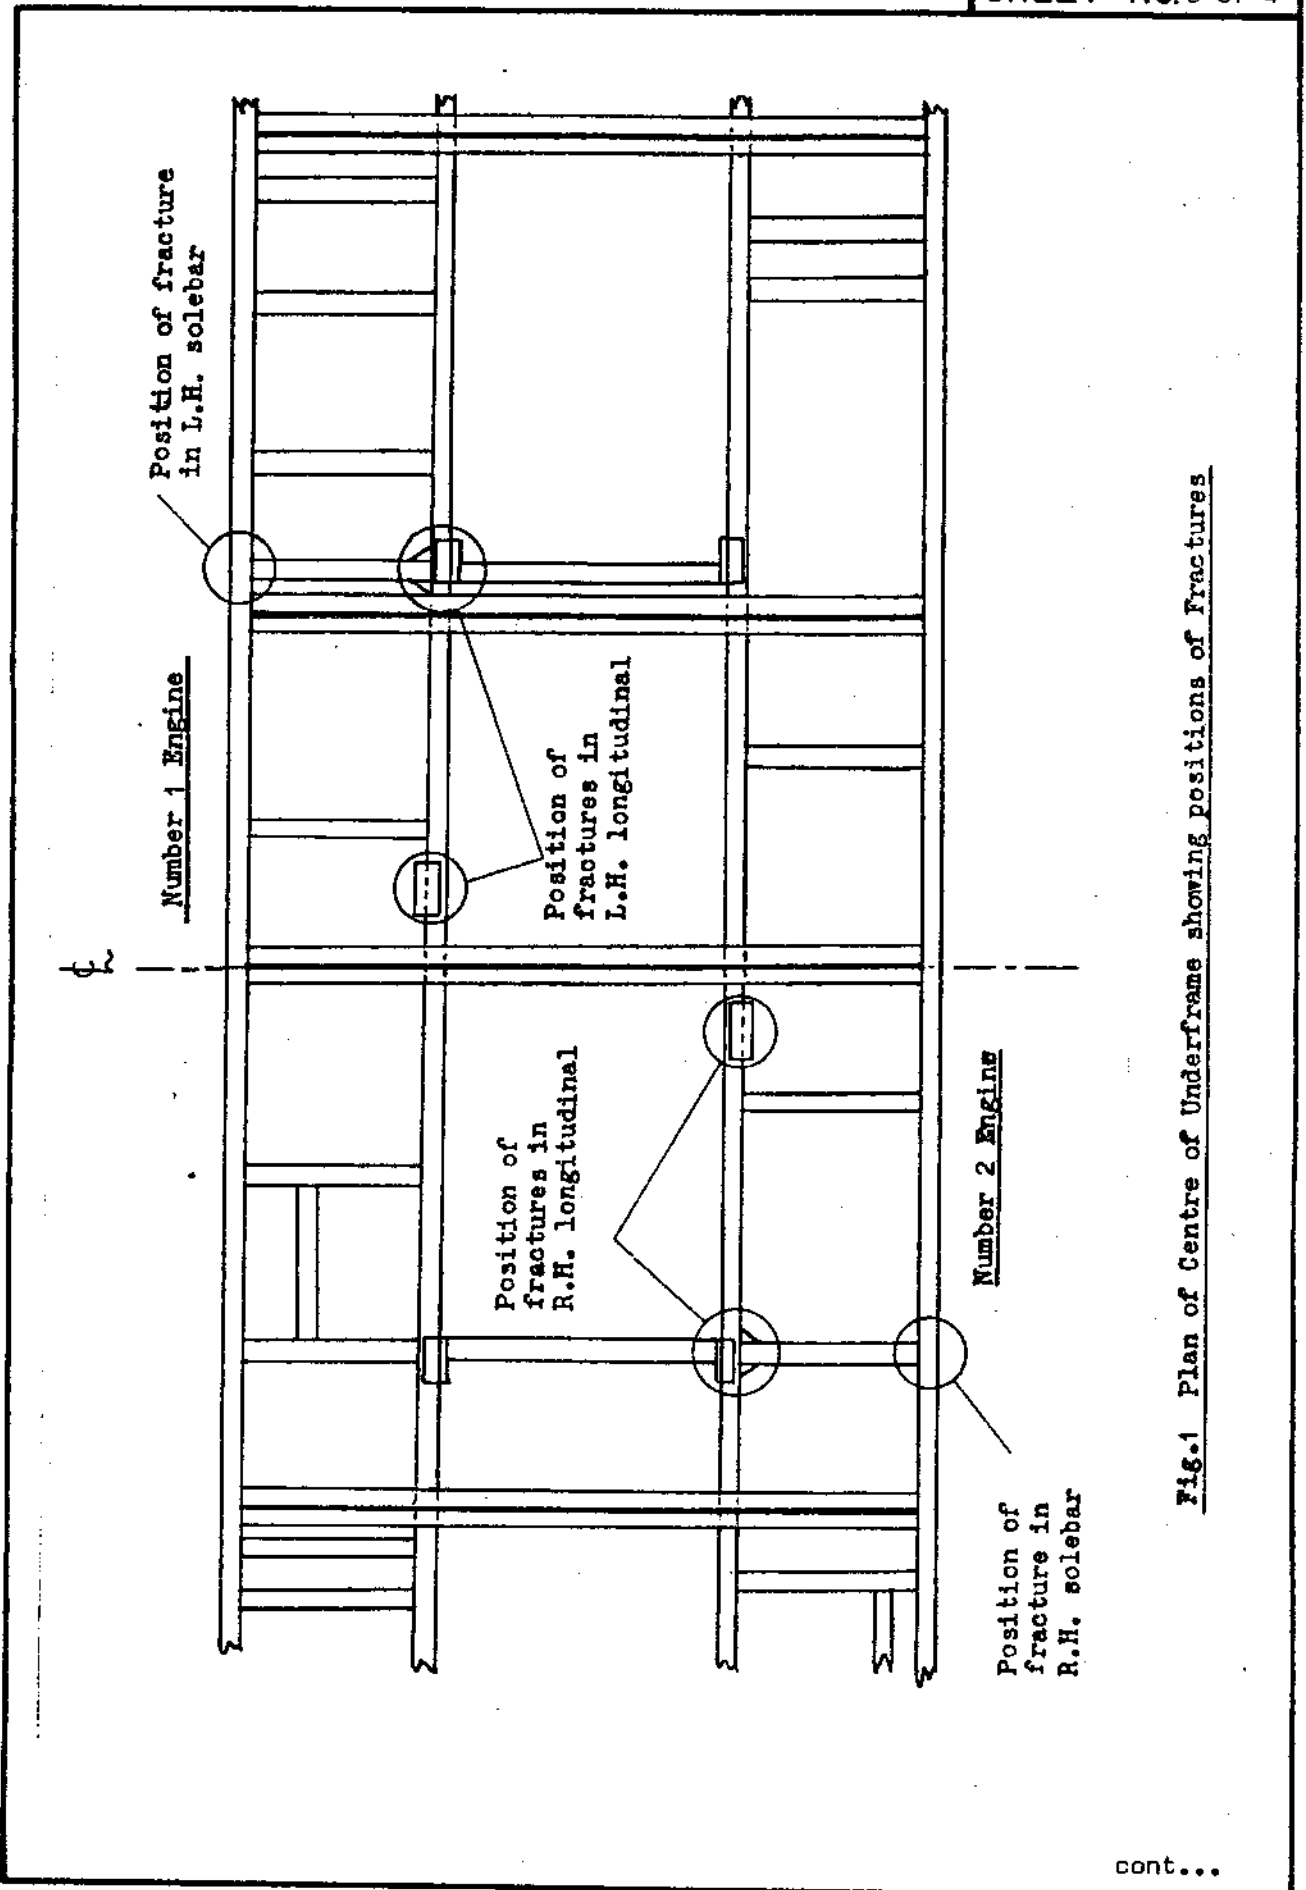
Plan of Centre of Underframe showing positions of Fractures
